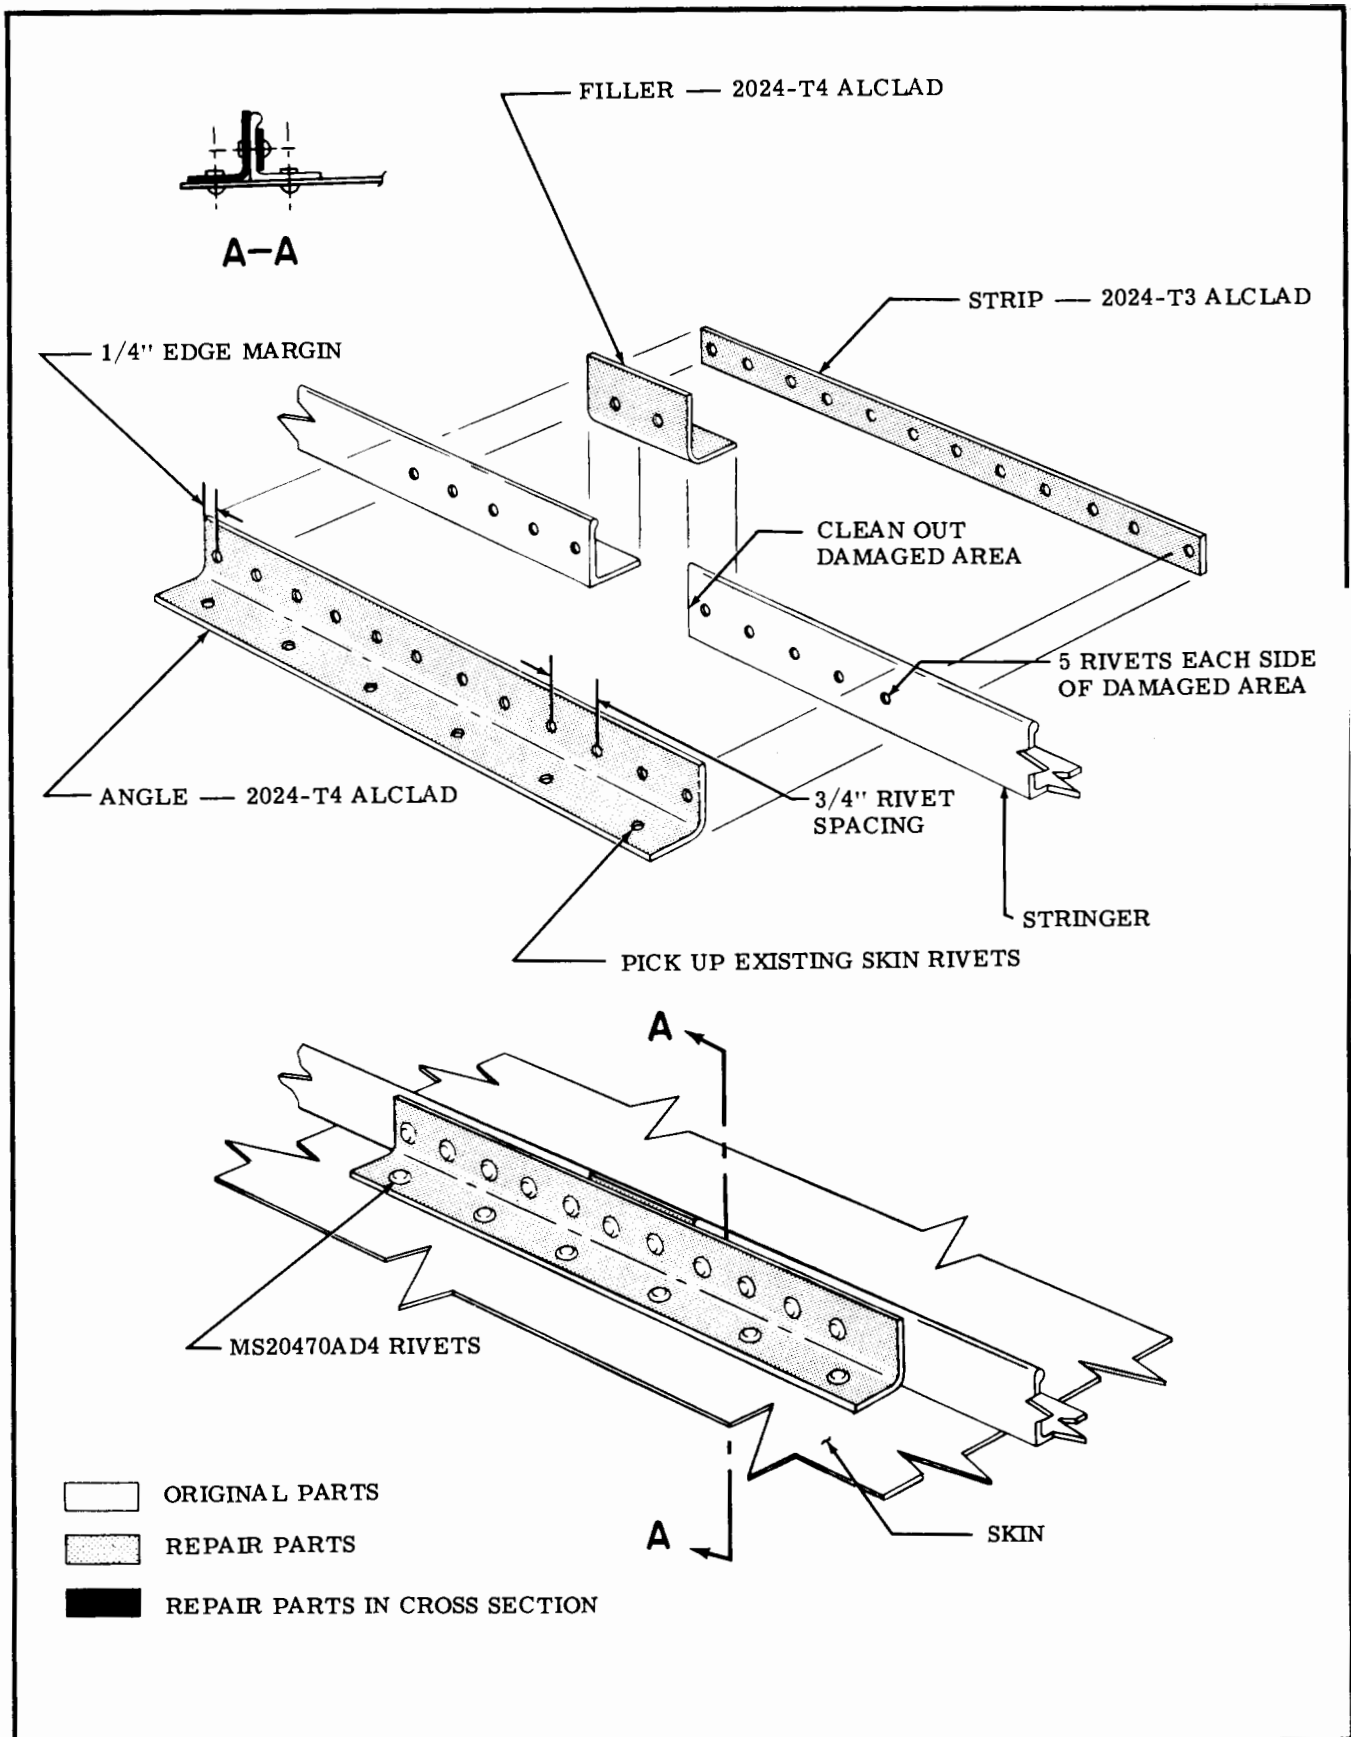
Stringer and Channel Repair (Sheet 2 of 4)
